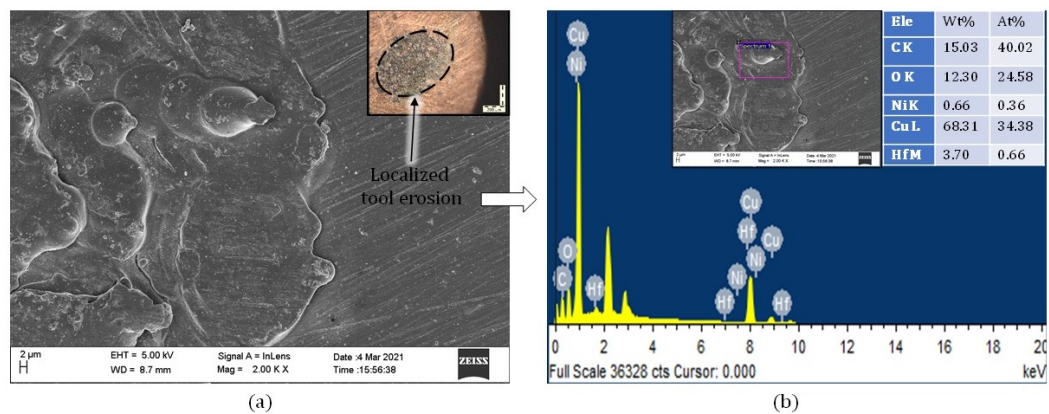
(a) Surface morphology of the eroded tool part (confined tool wear with their spark position) (b) material migration and diffusion within the tool eroded part
